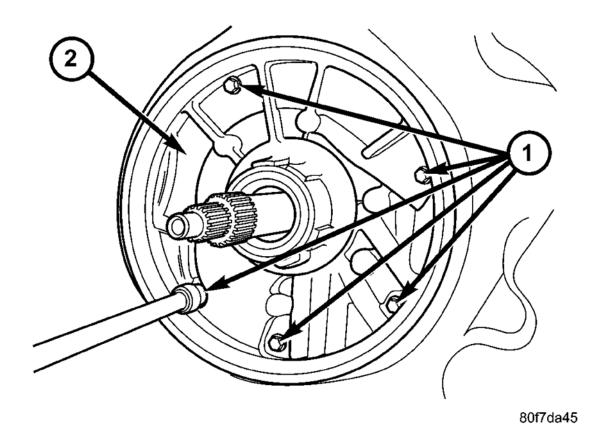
Installing Oil Pump Gasket Courtesy of CHRYSLER LLC
